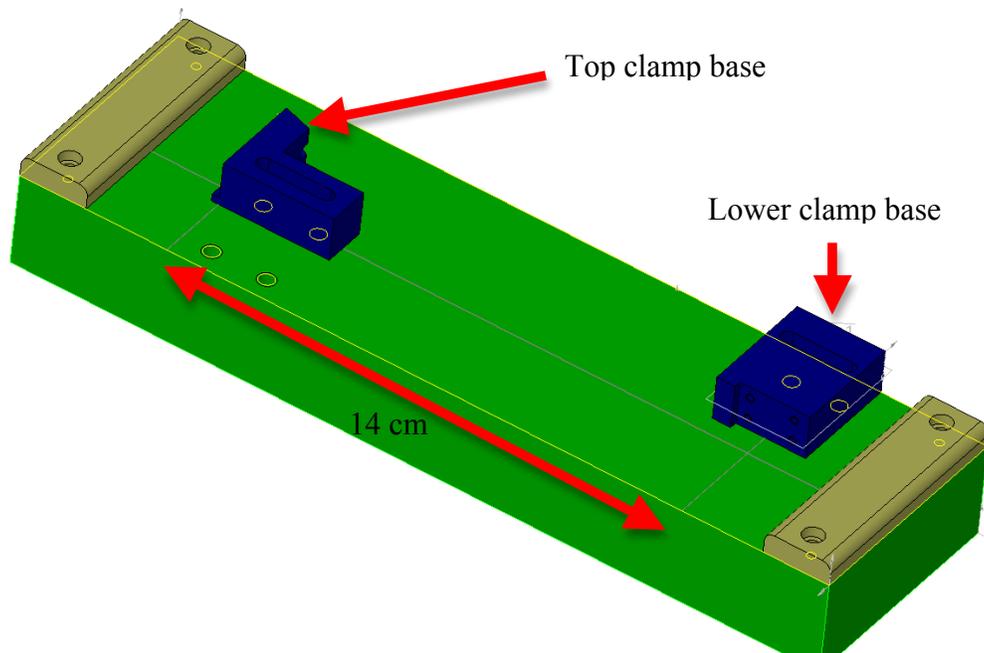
HTTS Wire Jig Assembly. The aluminium base is made green for clarity.
